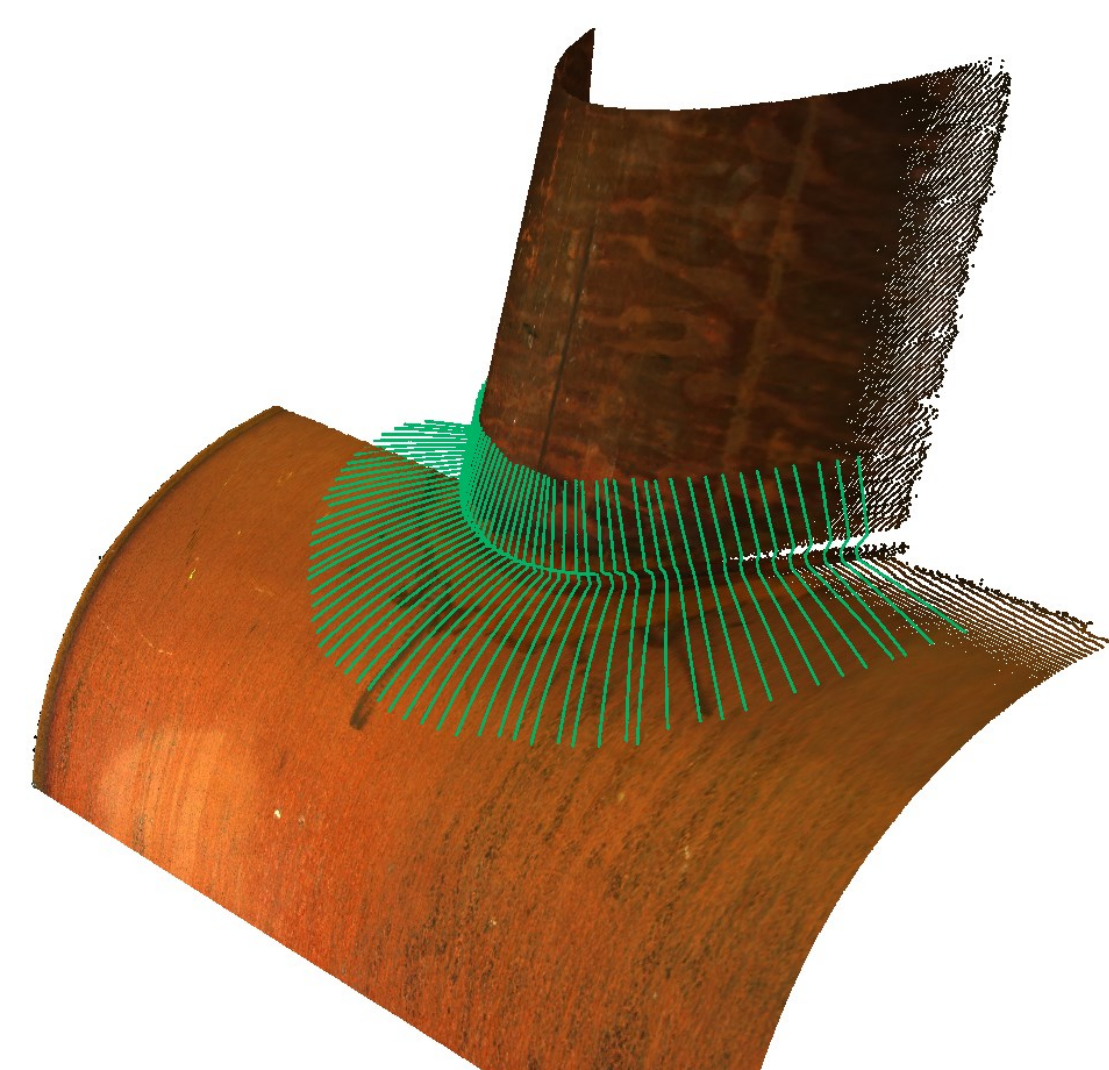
3D point cloud of the T-joint stub and profile scans of the weld groove
